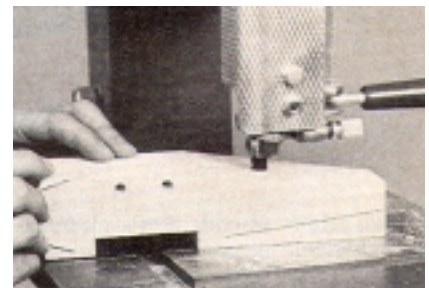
Drilling the engine cylinder holes 1/2-in. back from the nose.
